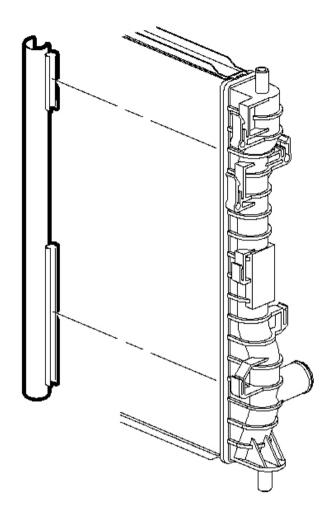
View Of Radiator Seals Courtesy of GENERAL MOTORS CORP.
